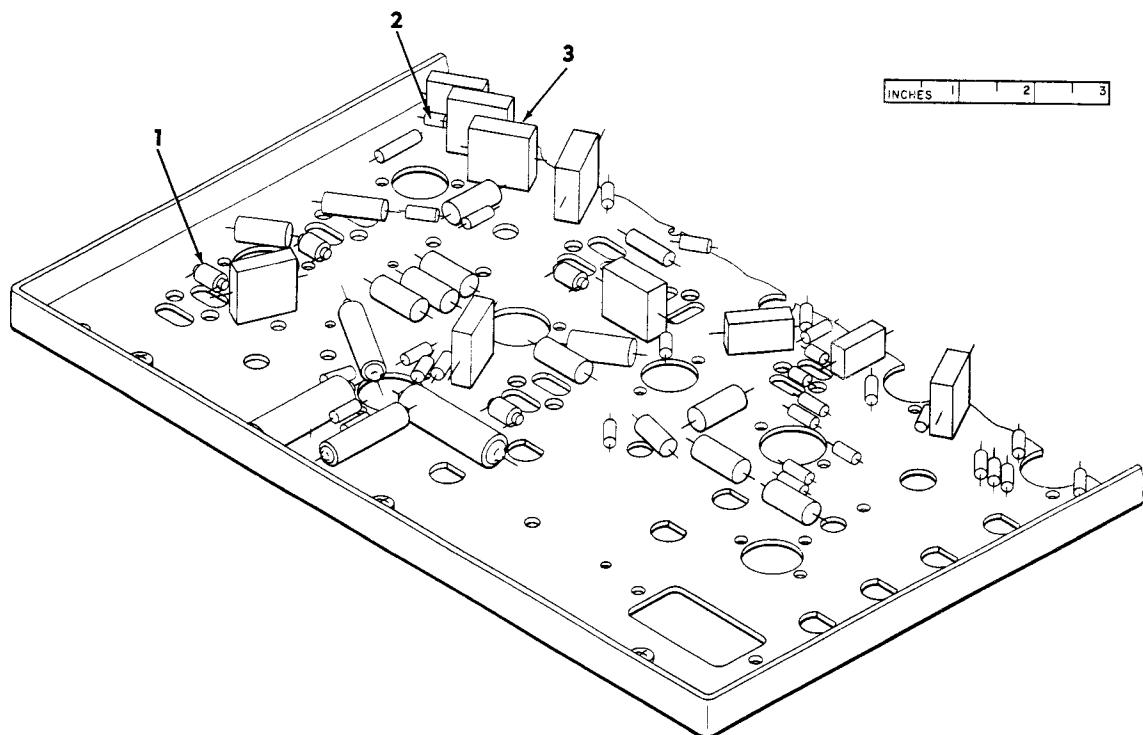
Generator assembly, pulse (9143996)—partial exploded view
